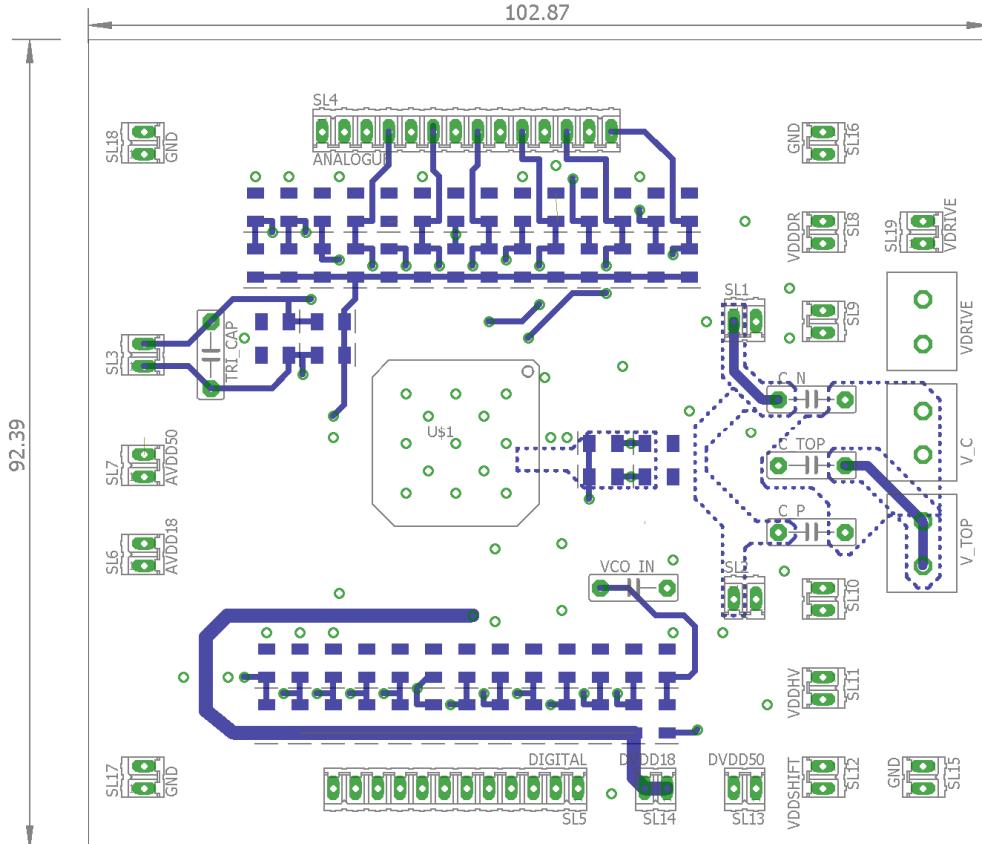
lctune018_psk daughter board layout (bottom layer)
